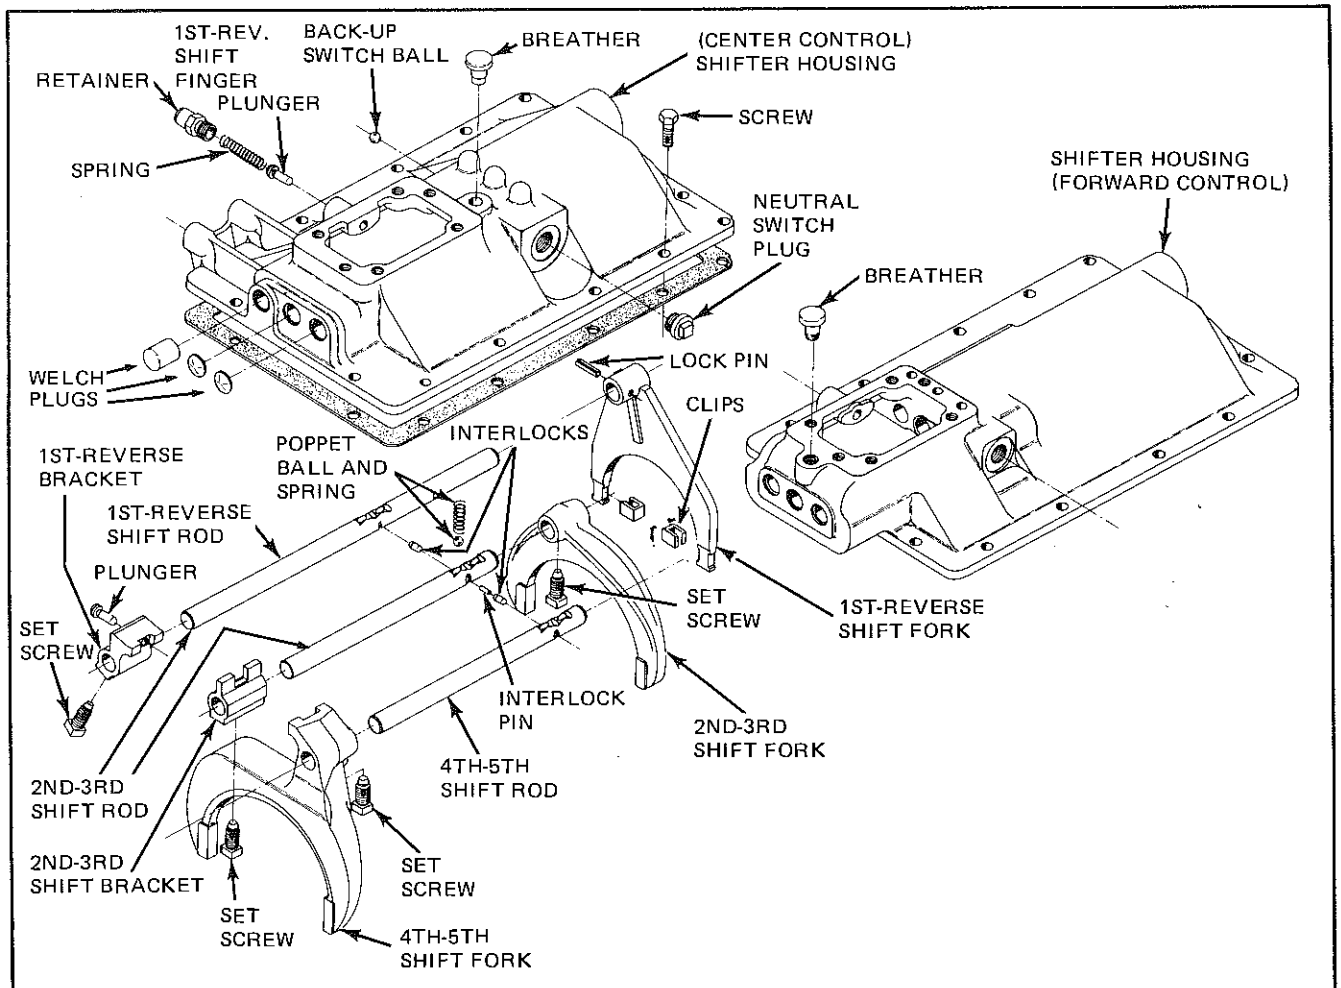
ES65-5 and CM60 Transmission Shifter Housing Parts
